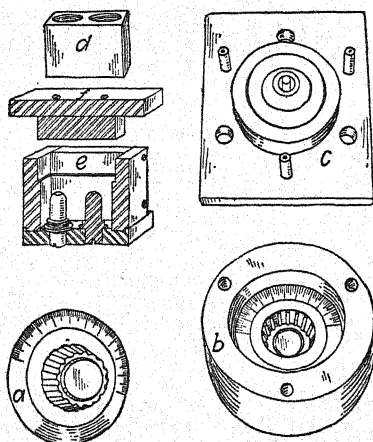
Bakelite moulds. *a.* Radio dial. *b.* Bottom part of mould. *c.* Top part of mould. *d.* Fixture. *e.* Bottom part of mould. *f.* Top part of mould. (Courtesy of Bakelite Corporation.)
